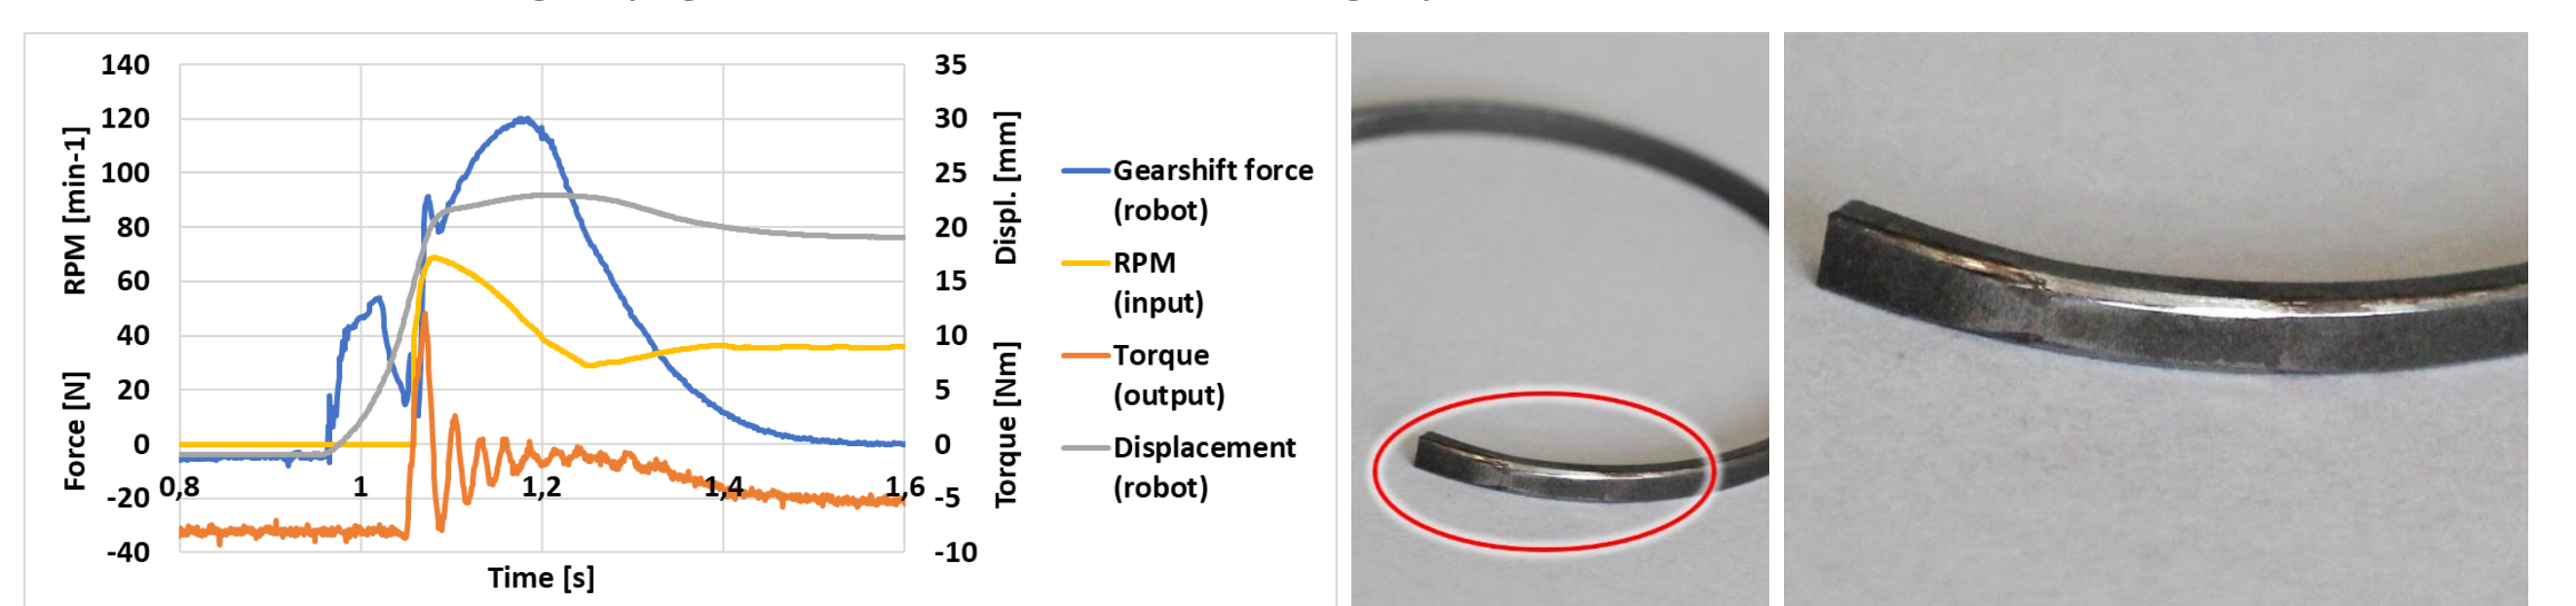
Shifting 3rd gear; mismatch speed 30 min⁻¹
